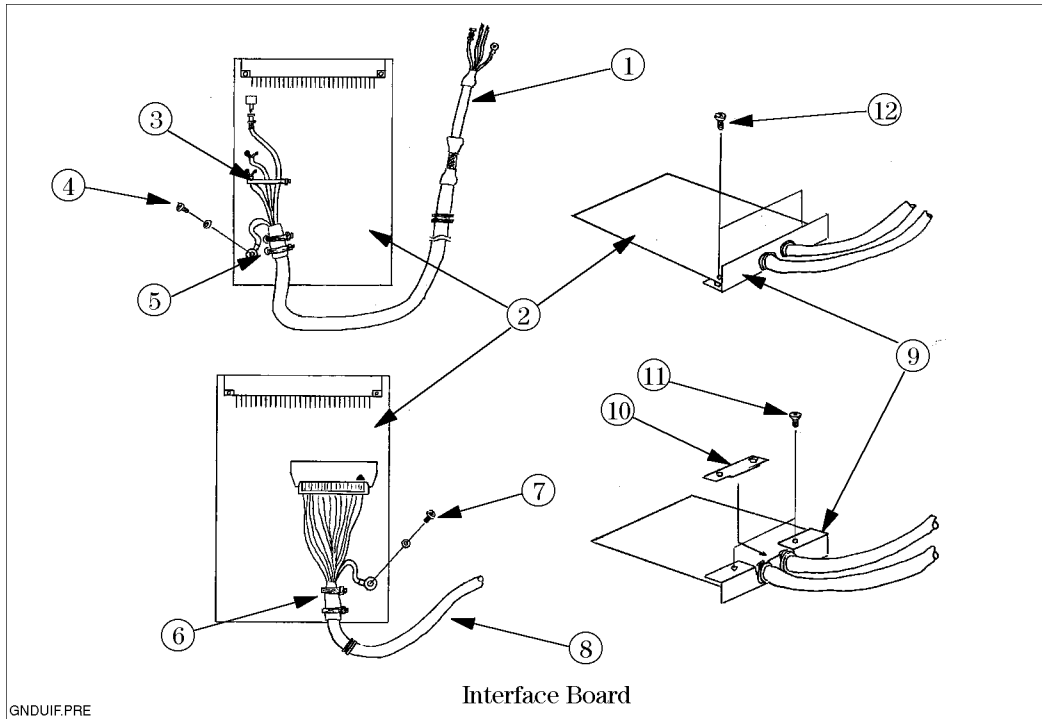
GNDU & I/F Module (41501-61001) Parts Location (2 of 2)
